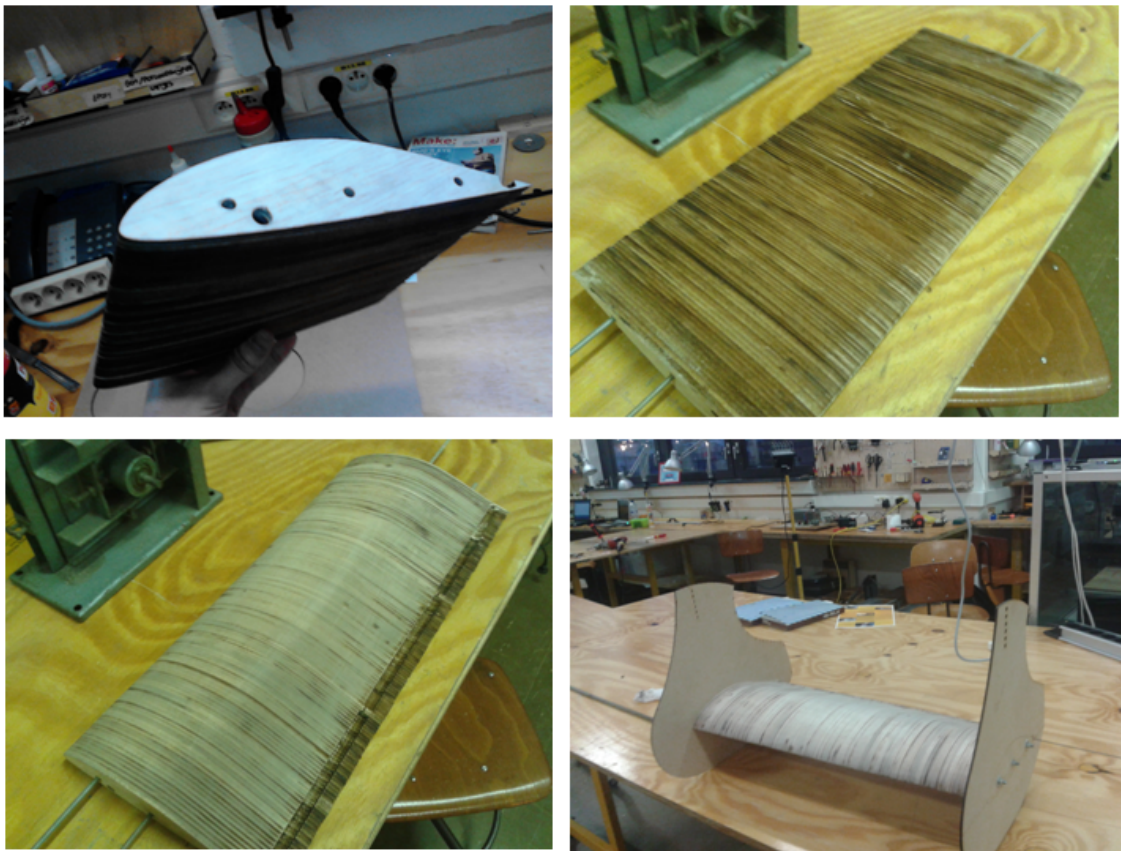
Blade section used in the laser cutter with the hole for the microtab
